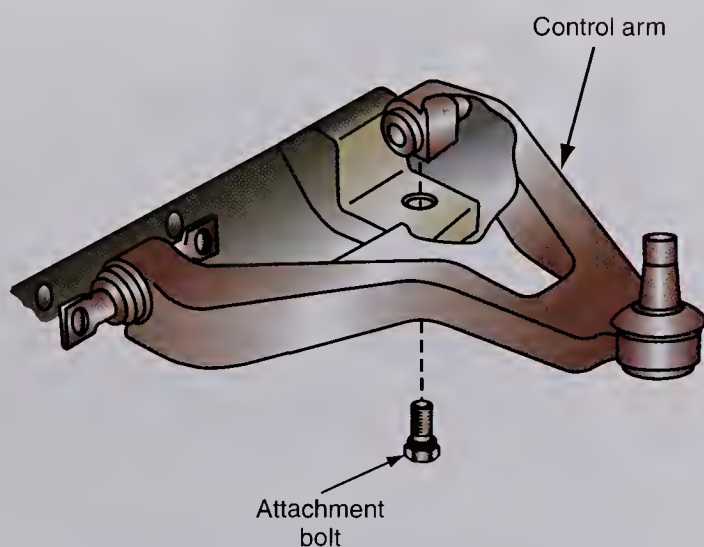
Removing the bolt and nut from the rear side of the lower control arm.
